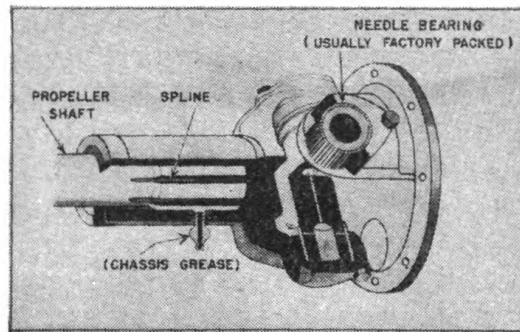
Needle bearing type universal joint packed with fibrous grease.
